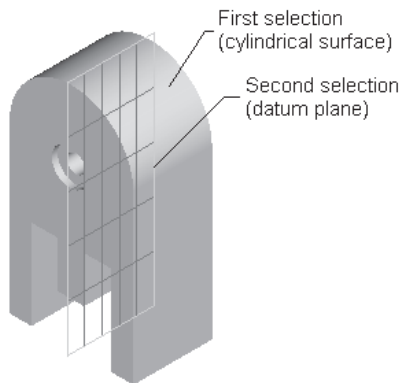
Selecting a cylindrical surface and a default datum plane to create a datum plane
